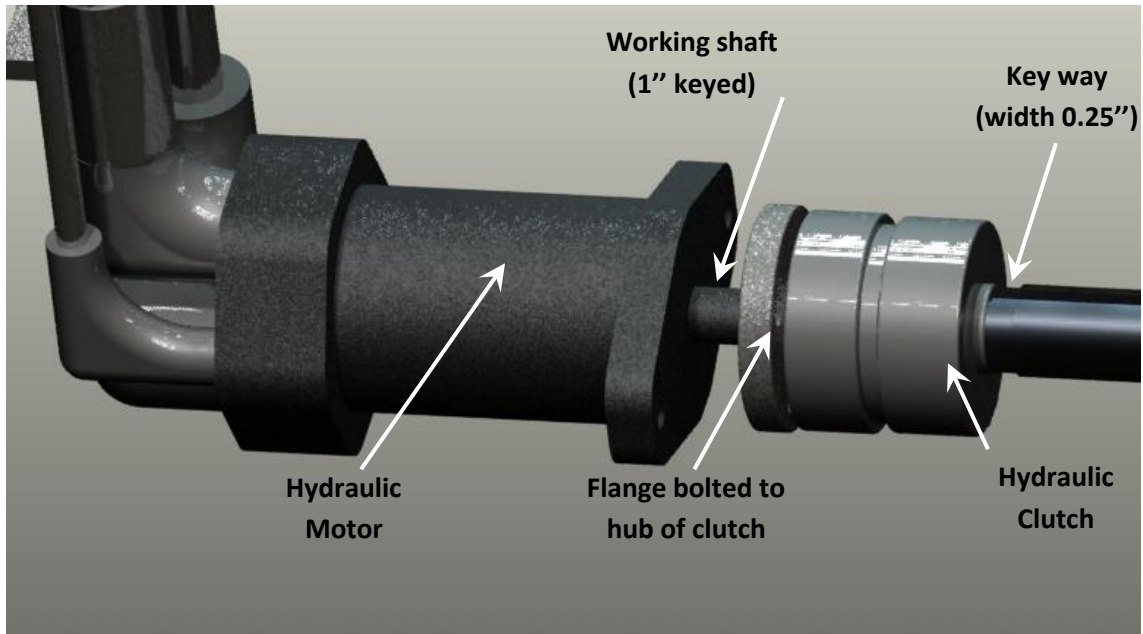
Connection of hydraulic clutch to motor via a bolt flange [18].
